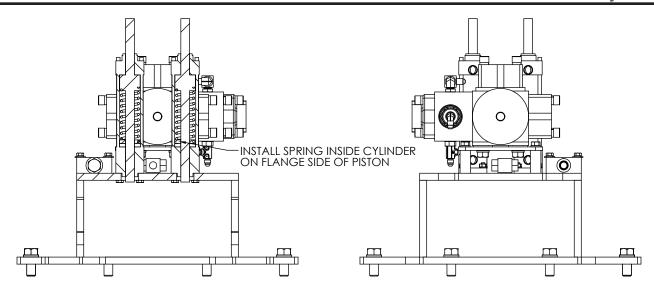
Reversing Pin Cylinder Assembly Front View / Rear View
